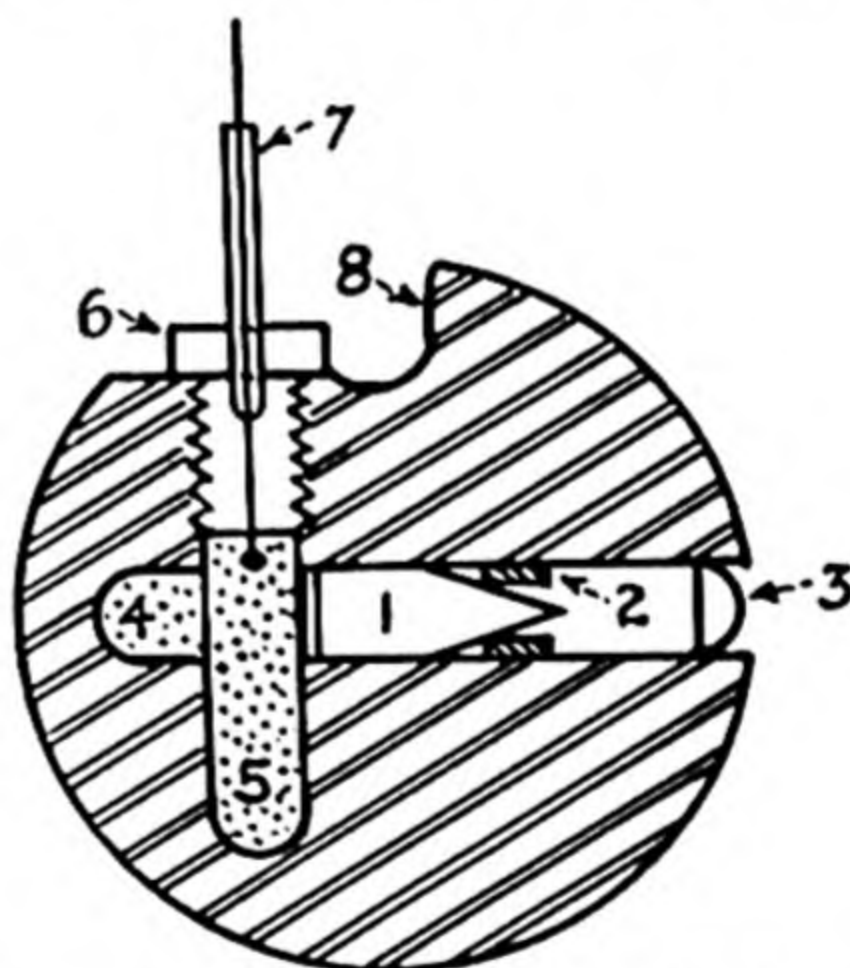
Construction of "gun" used in Lane-Wells gun perforator. 1, bullet; 2, rubber bullet retainer; 3, seal cap; 4, short cartridge; 5, long cartridge; 6, fuse plug; 7, fuse-pin assembly; 8, steel body of tool.
